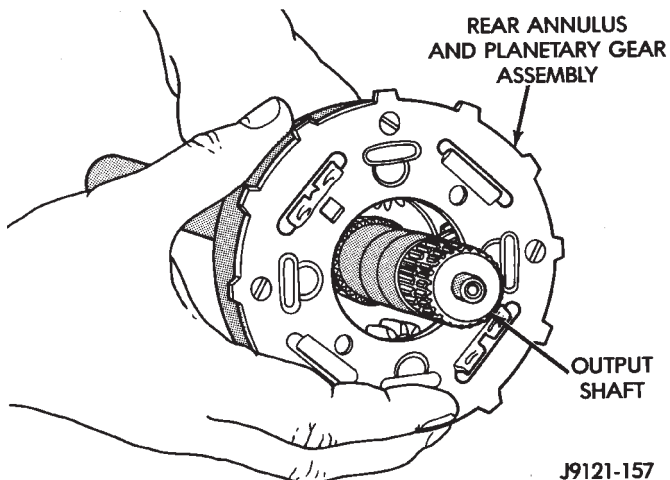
Installing Rear Annulus And Planetary On Output Shaft
